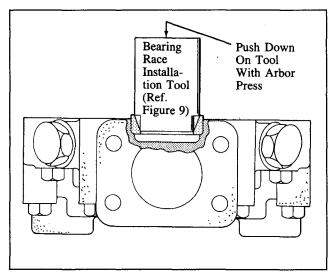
Installation of Bearing Race (48) into Valve Block (33).
